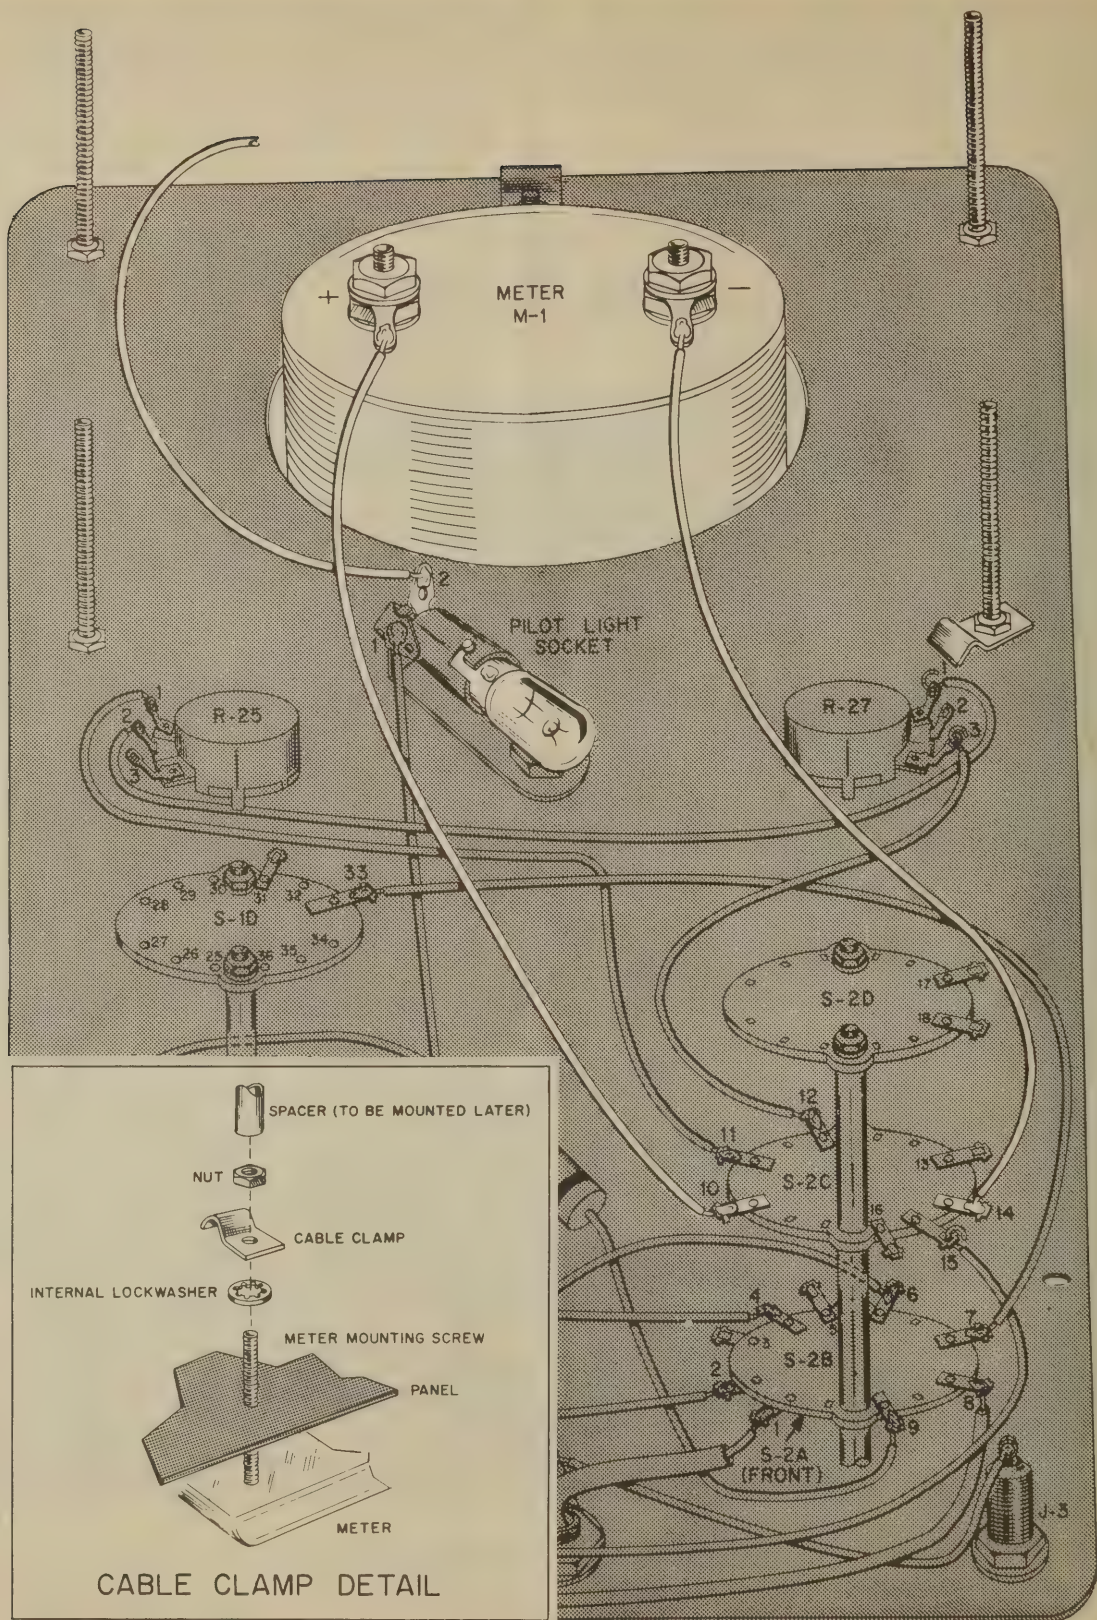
HOW TO MOUNT AND WIRE THE METER
